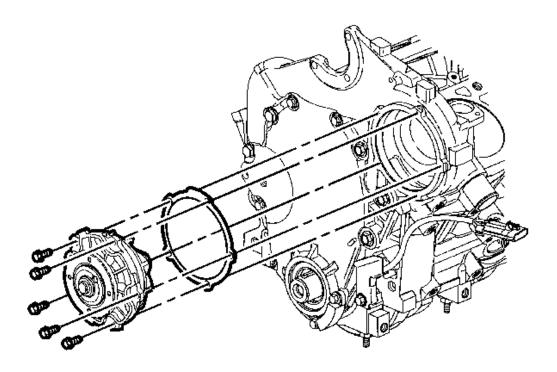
View Of Water Pump Assembly & Bolts Courtesy of GENERAL MOTORS CORP.
